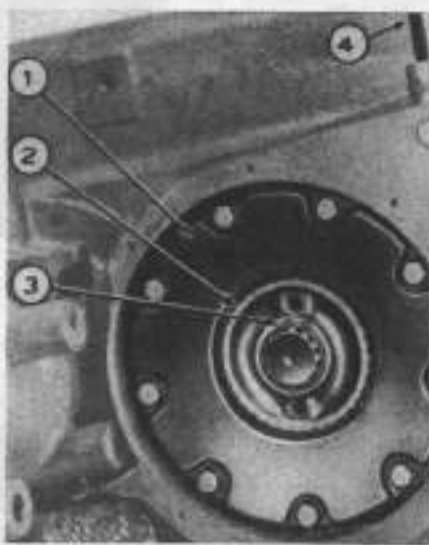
Series 44 live power take-off clutch view with the housing cover removed.
